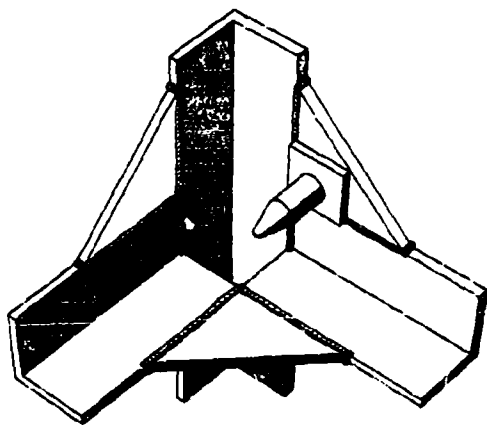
Chassis dowel pin arrangement for welded gusset
